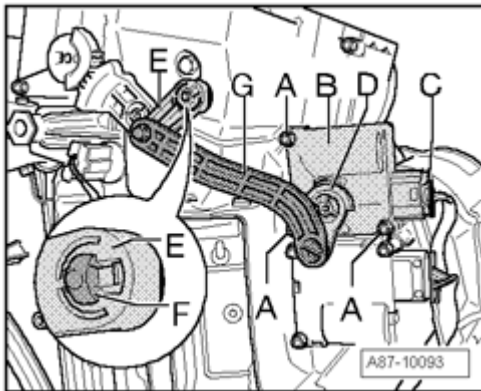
Identifying Connector, Fastener, Bolts, Control Motor, Connecting Rod, And Connecting Element
